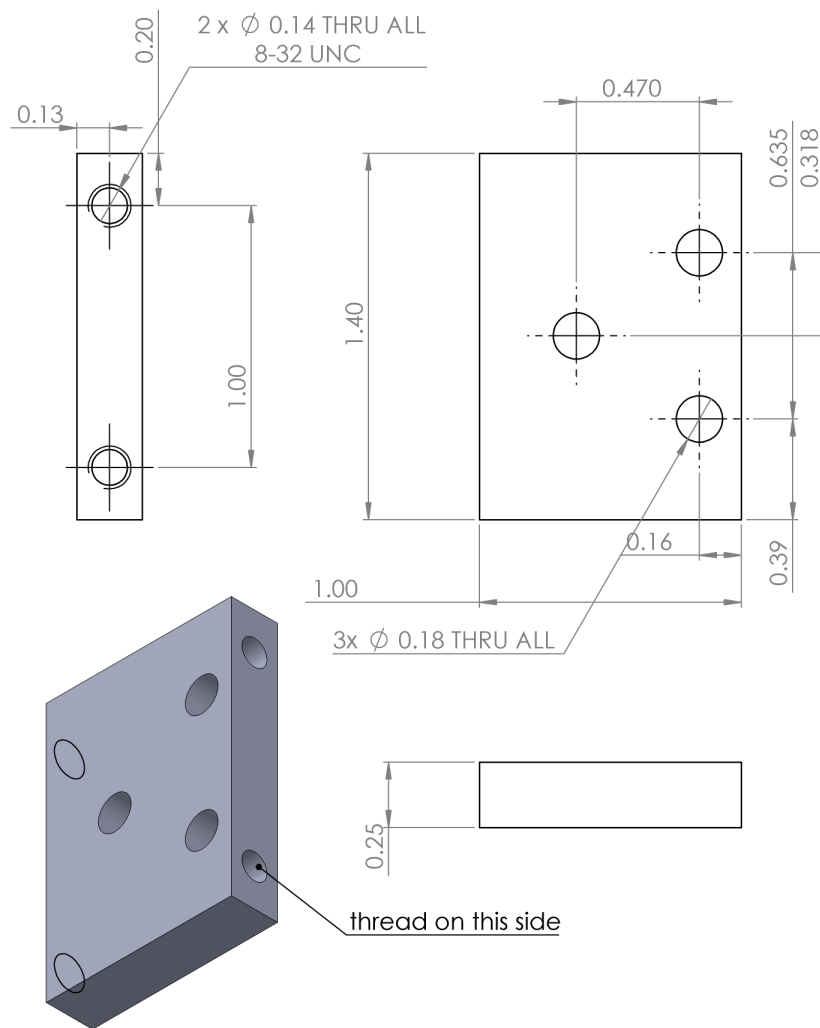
Second generation device stress relief. Two of those parts were machined out of brass.
